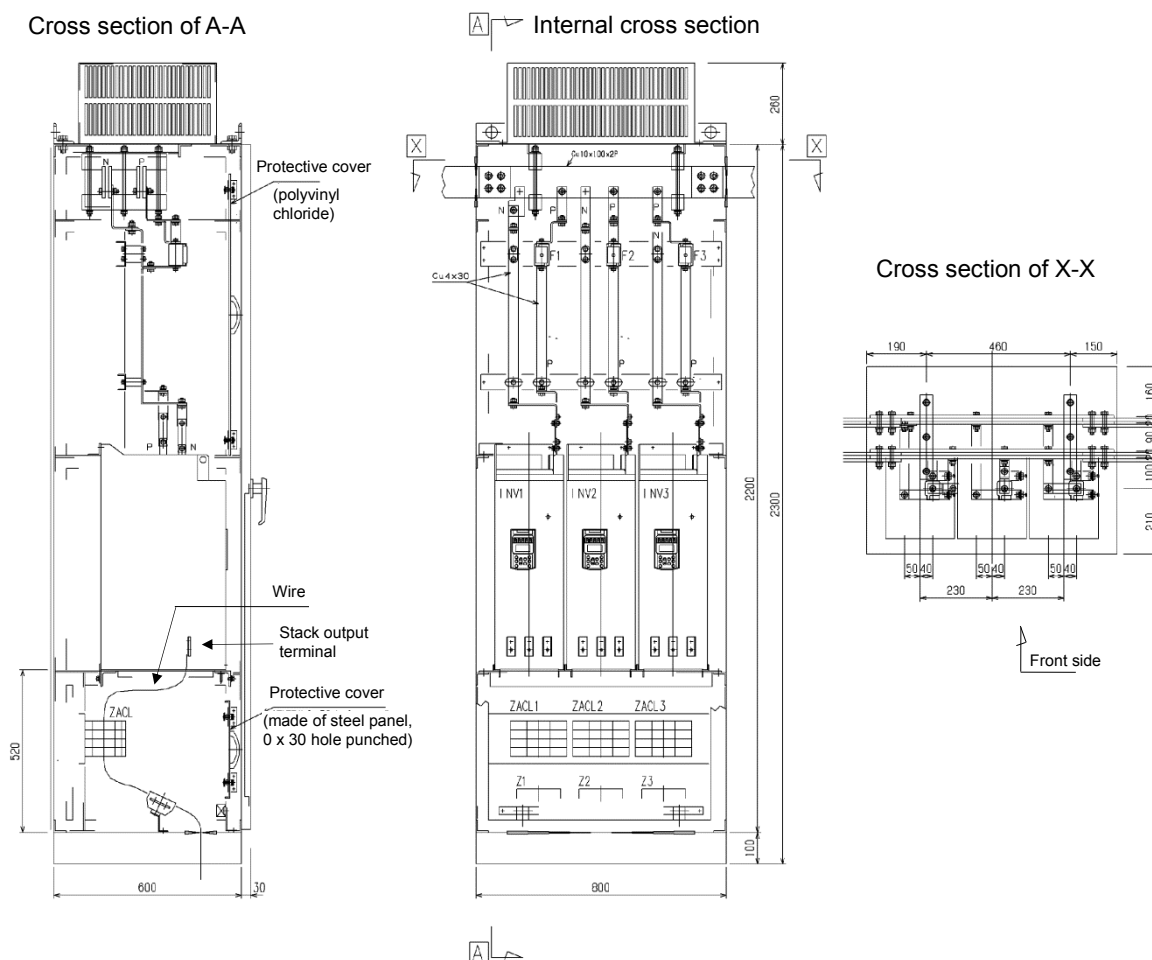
Example of internal layout for Frame 1 size (400V: 30 to 45 kW)
